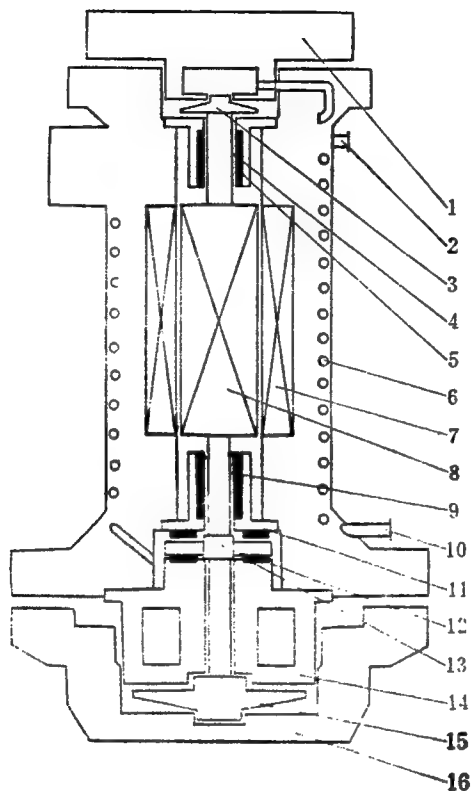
1) top cover; 2) inlet for secondary water cooling system; 3) axial propeller; 4) upper shaft; 5) upper guide bearings; 6) primary water cooling system coils; 7) stator; 8) rotor; 9) lower shaft; 10) outlet of secondary water cooling system; 11) lower guide bearings; 12) thrust washers; 13) lower thrust bearing assembly; 14) thermal insulation; 15) main propeller; 16) pump housing.
